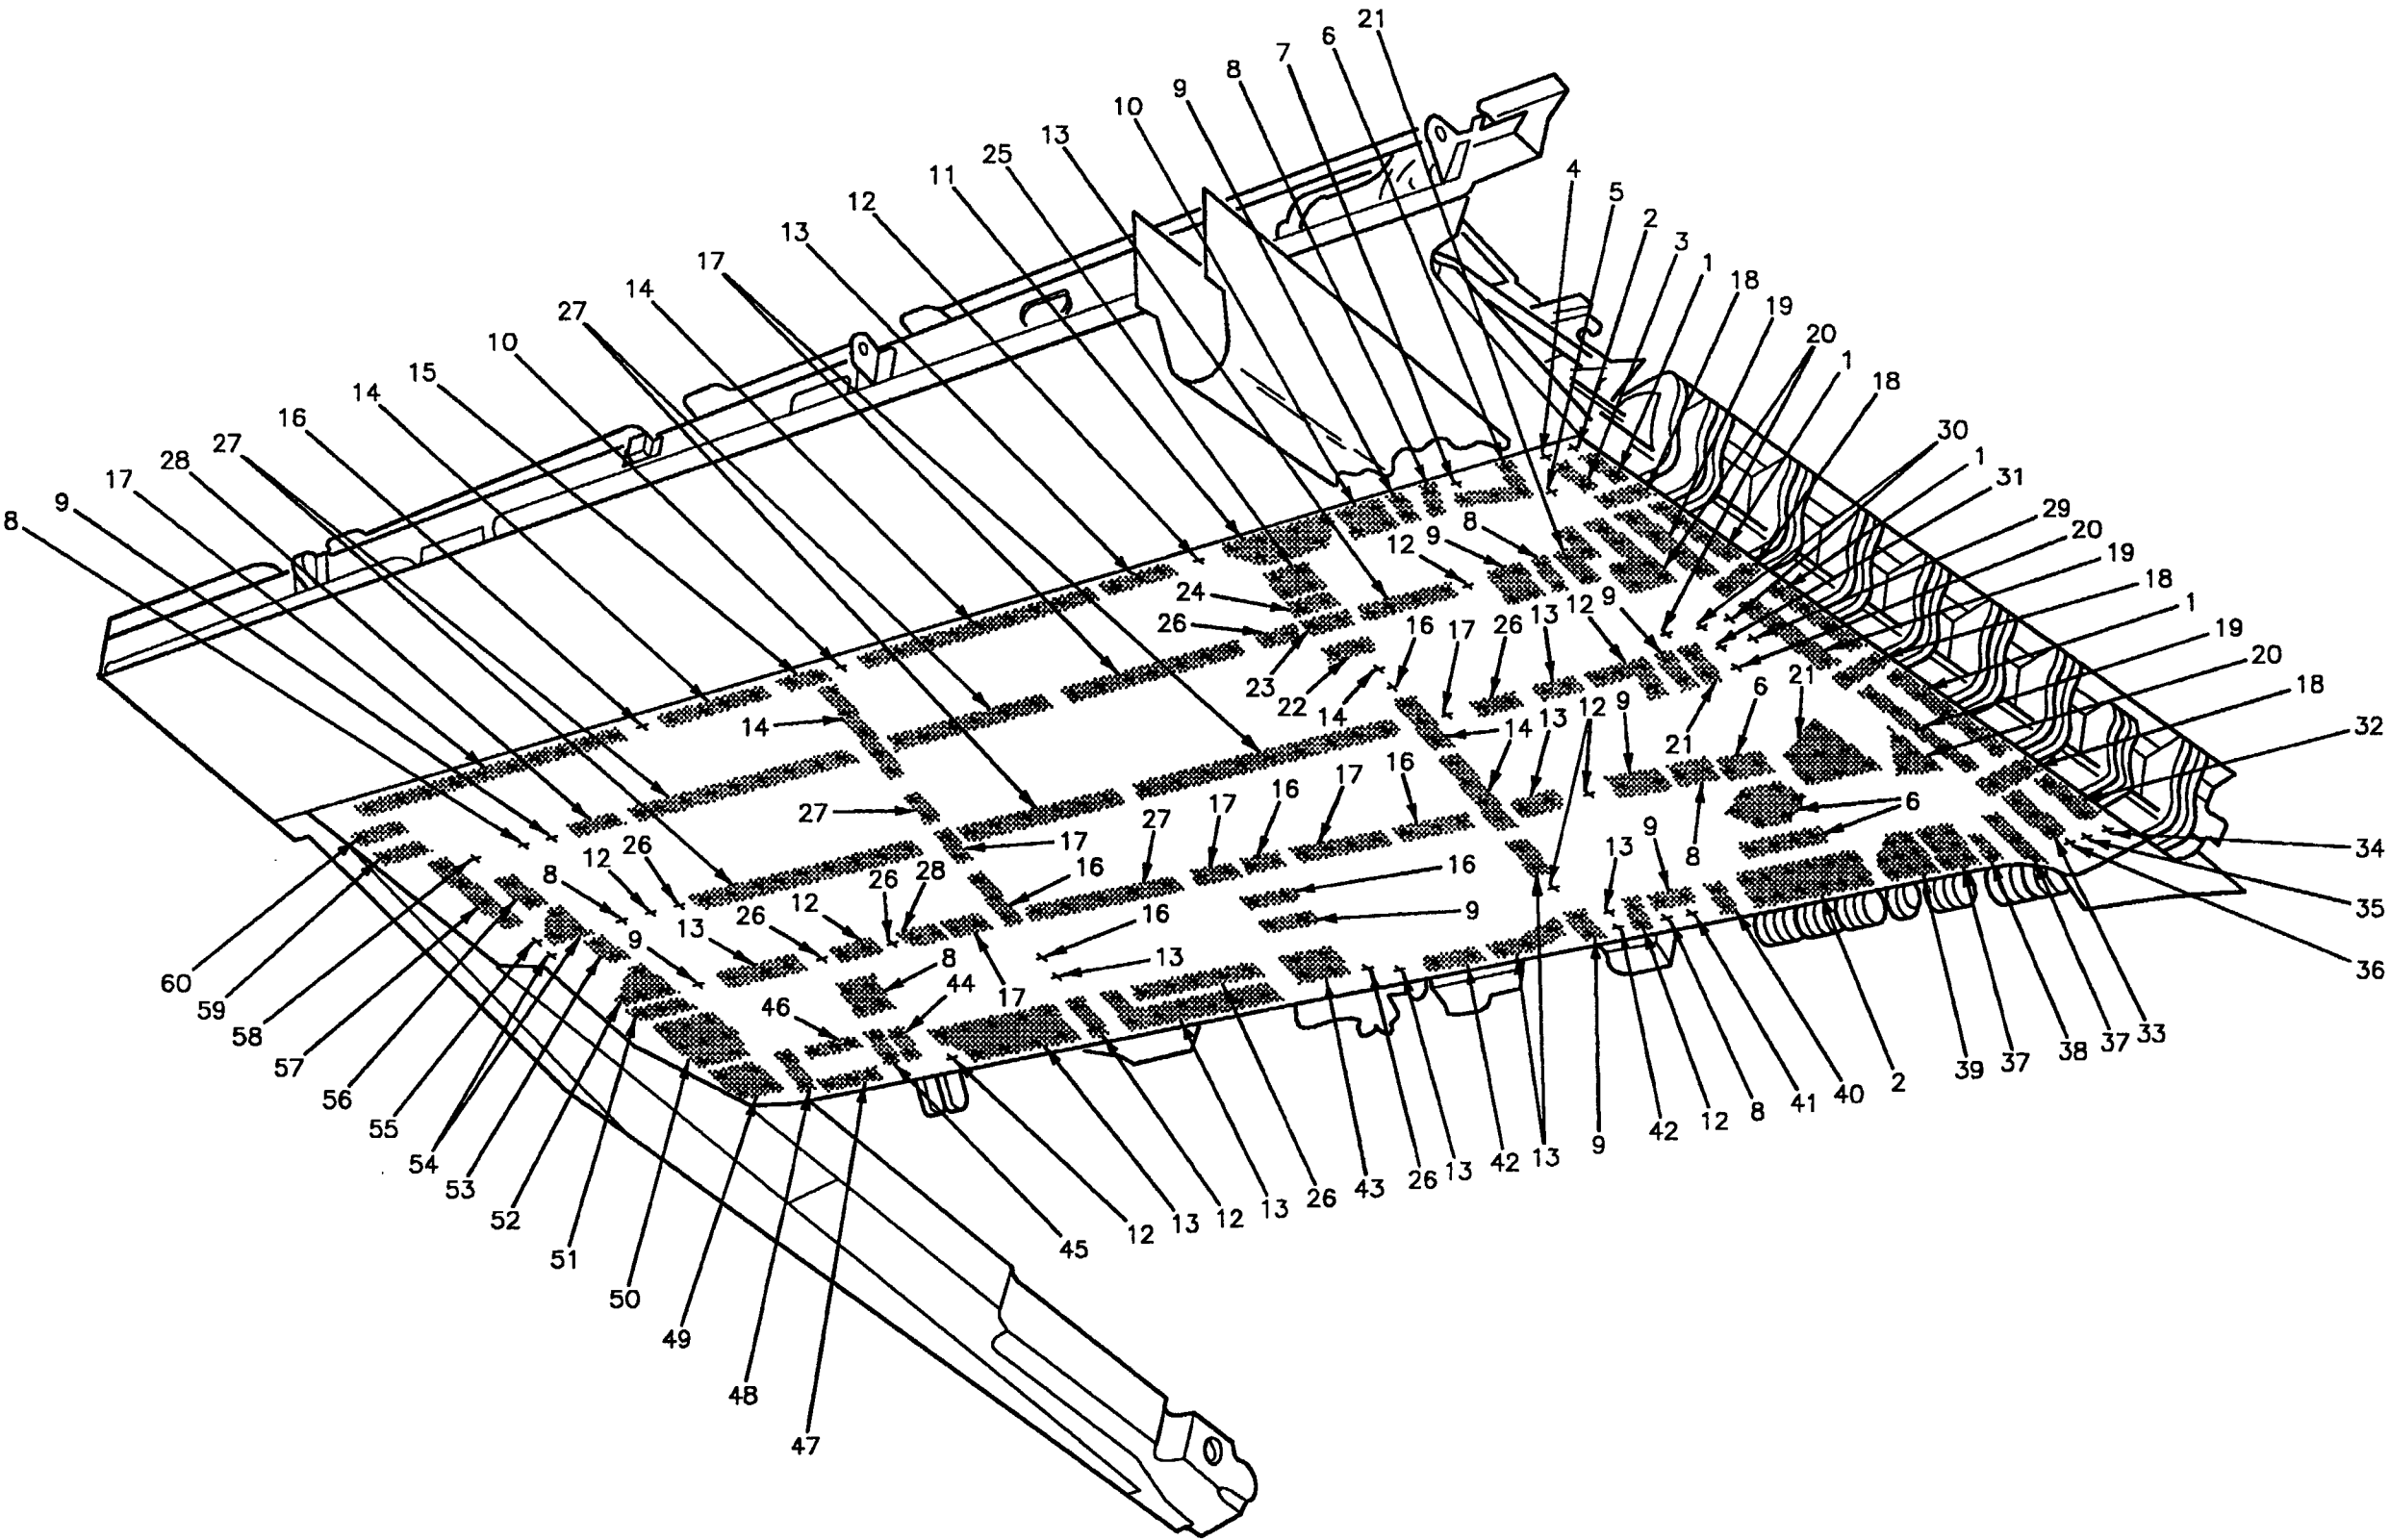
Outer Wing Lower Skin Fasteners (Sheet 1)
